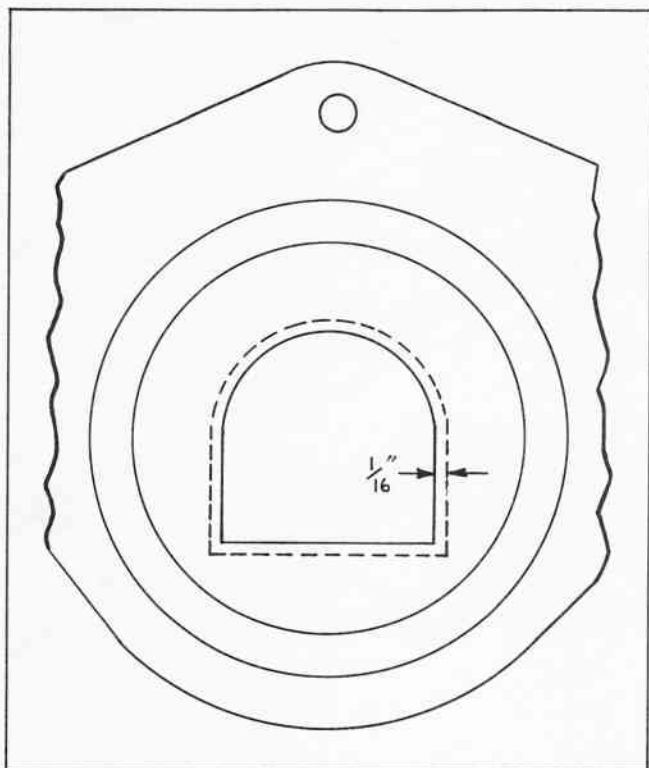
J-6116, Clutch Unit Holding Fixture Modification
